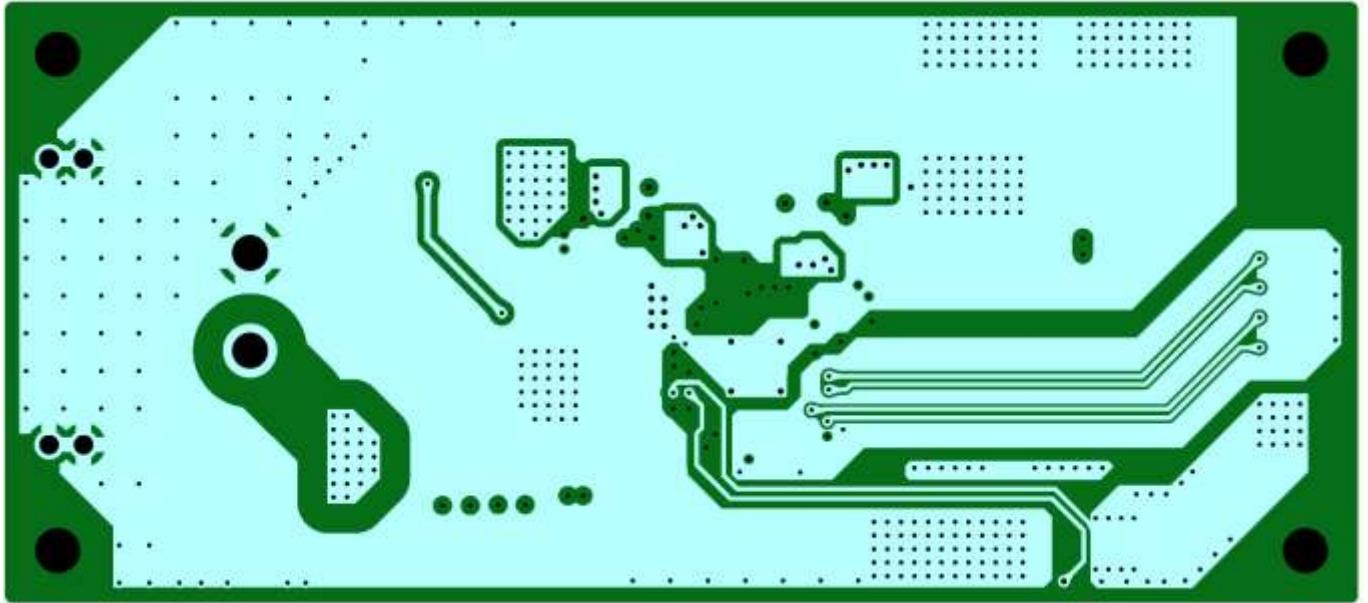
PCB Pattern (Front View) (Option 1)
